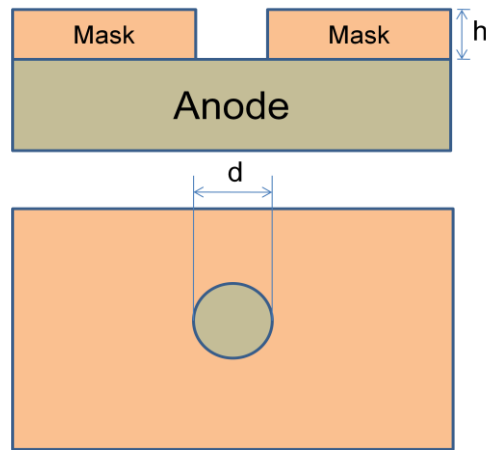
Side and Top View of the Anode and Mask prior to machining (single dimple)
